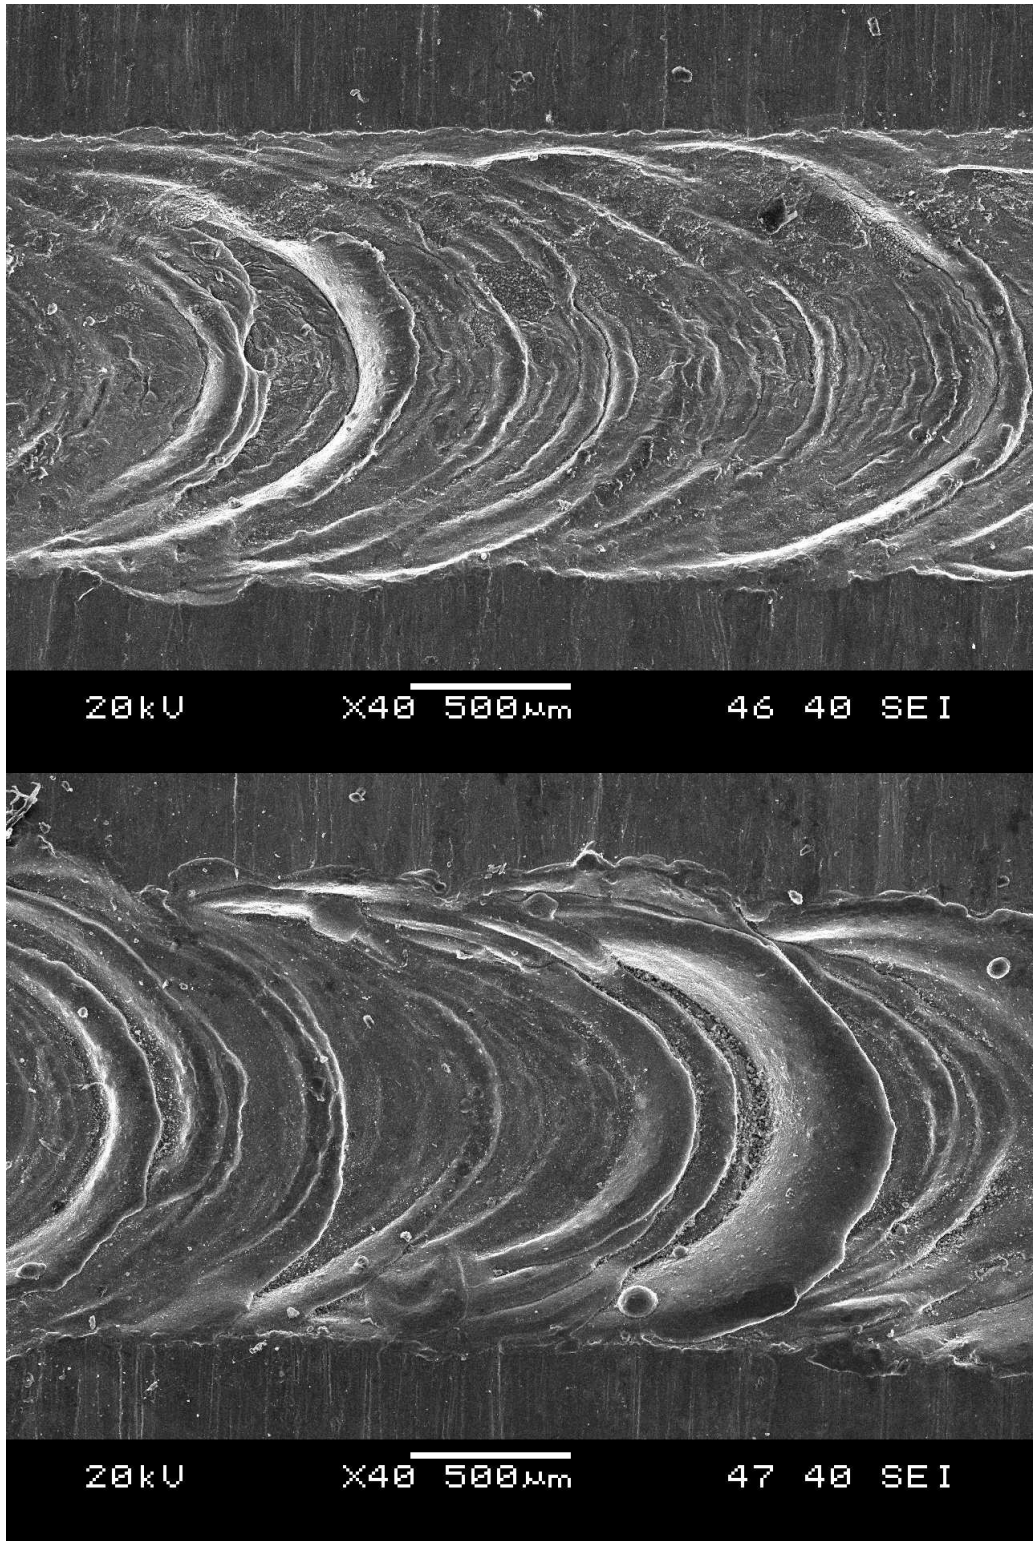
Fibre laser weld made at 2 kW and 50 mm/s: a) top and b) bottom weld bead surfaces.
